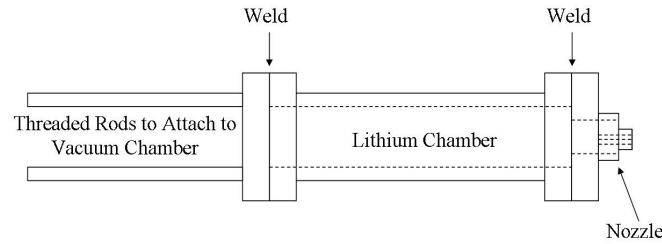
A schematic of the lithium oven. Dotted lines indicate holes. The front flange is welded shut and the nozzle is bolted, rather than welded, to the front of the oven; this allows us to remove the nozzle and load the oven with lithium. Two heat shields (not pictured) surround the oven.
